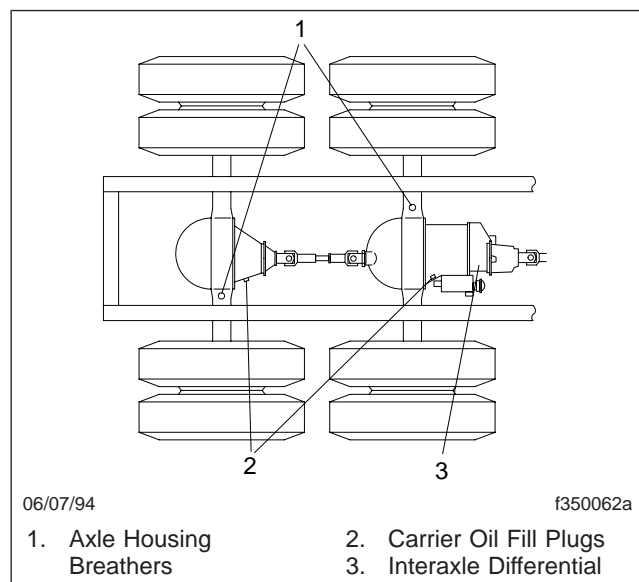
, Fill Hole Plug and Axle Housing Breather Locations
